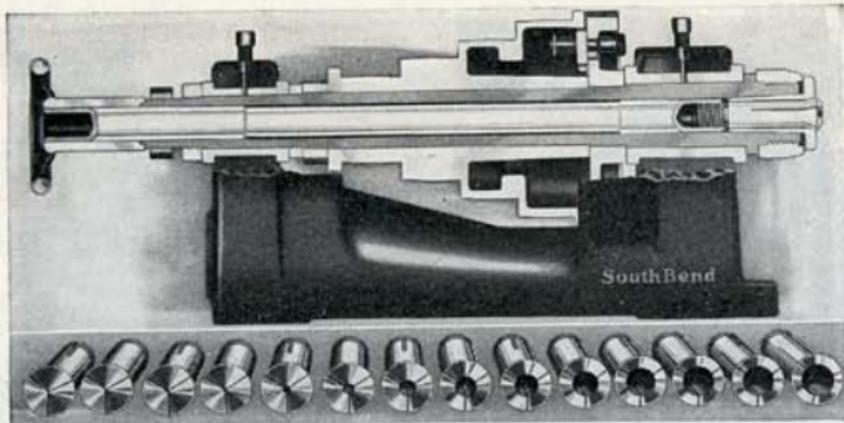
Cross Section View of the Lathe Headstock Showing Draw-in Collet Chuck. Note the Group of Collets.
